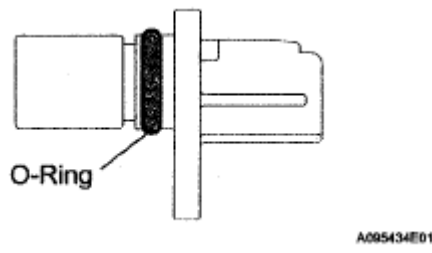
Applying Light Coat Of Engine Oil Onto O-Ring
